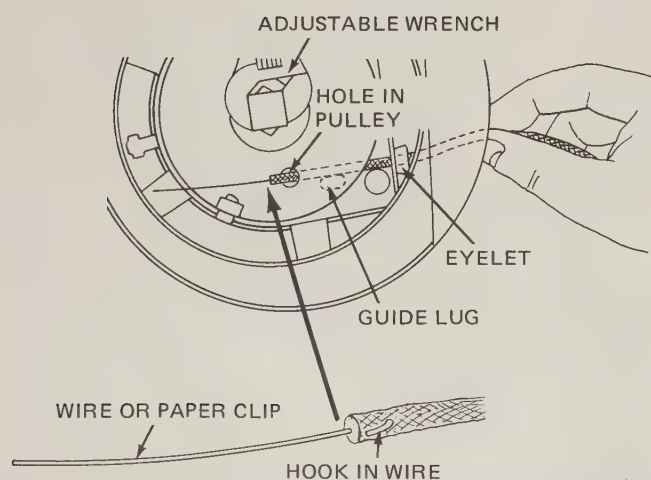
When rethreading the rope into the pulley hole, you may find that a piece of wire hooked into the end of the rope, as shown at the bottom, will make it easier.
